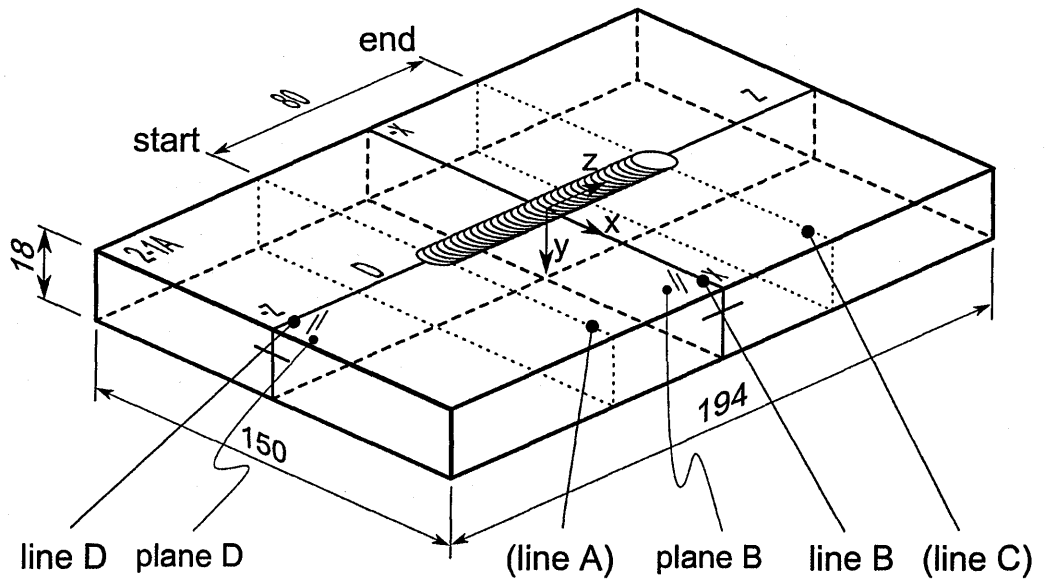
View of TG4 3-pass slot weld test specimen showing dimensions and position of weld, from [9]
